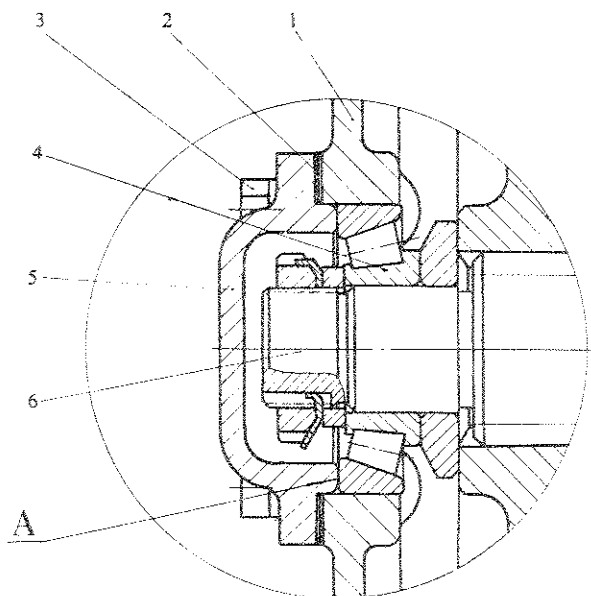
Adjustment of preloading the bearings of the drive shaft
